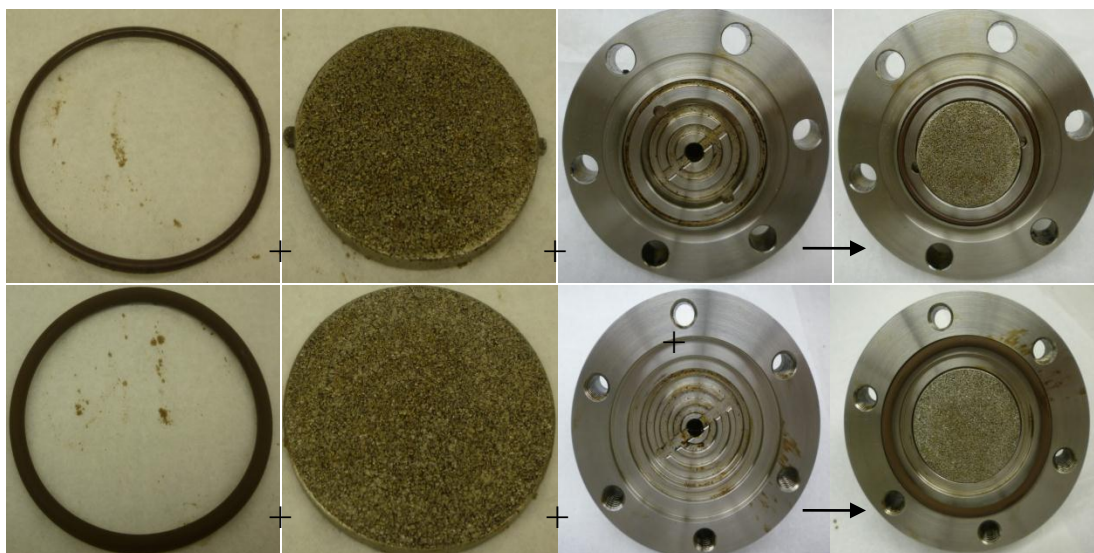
Photo of filter parts. Top: inlet O-ring, inlet steel filter, inlet cap, inlet filter assembly; Bottom: outlet O-ring, outlet steel filter, outlet cap, outlet filter assembly.
